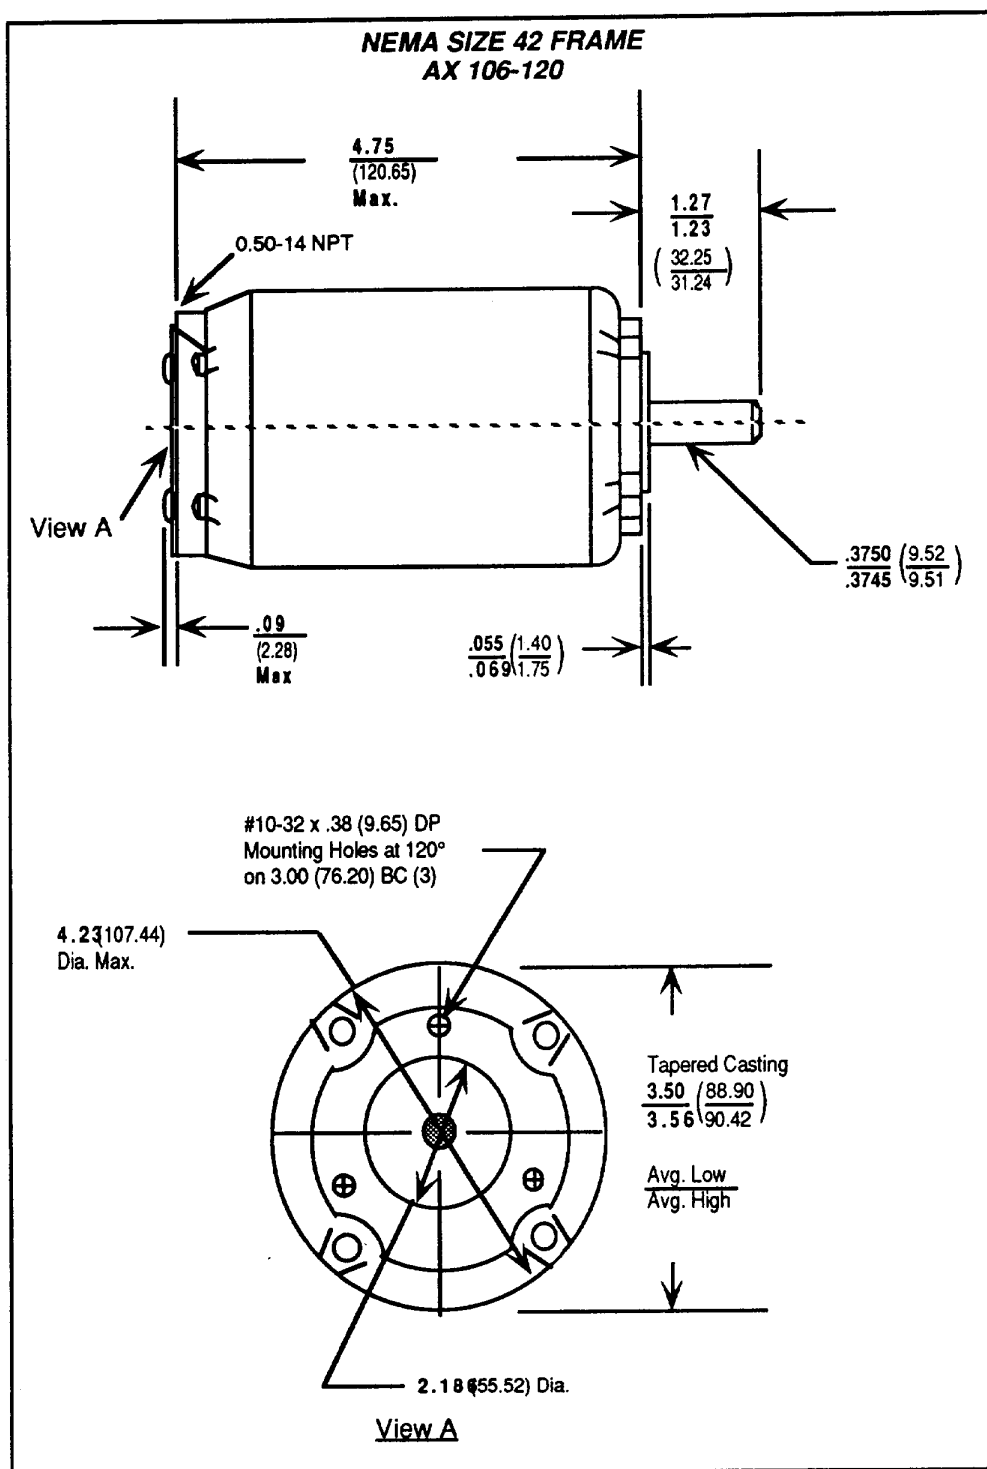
NEMA Size 42 (AX 106-120) Motor Dimensions
